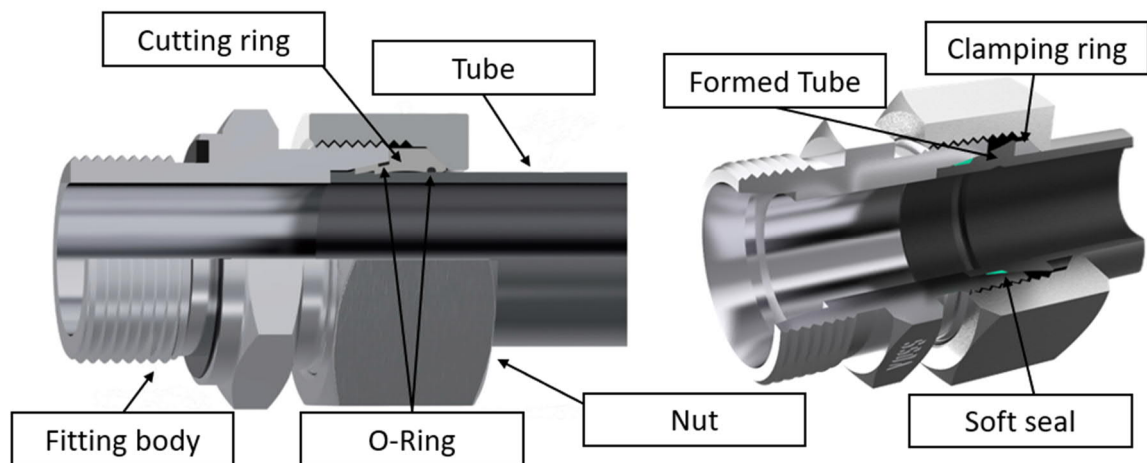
Bite fitting with elastomer seal on the left and formed tube-end fitting on the right (adapted from Voss 2018, p.28;432).
